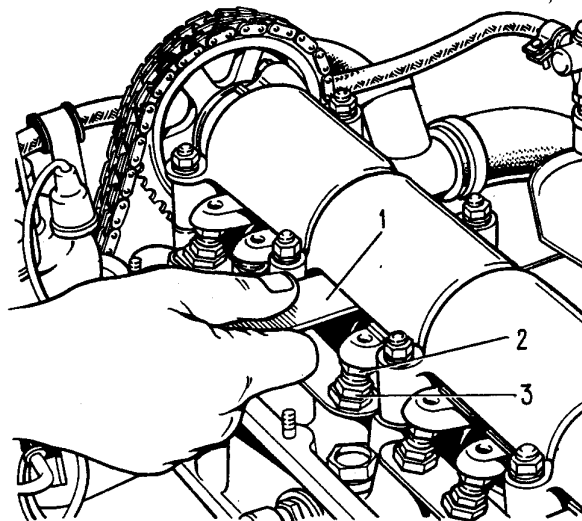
Checking Rocker-to-Cam Clearance: 1 - feeler gauge A.95111; 2 - adjusting bolt; 3 - adjusting bolt locknut
